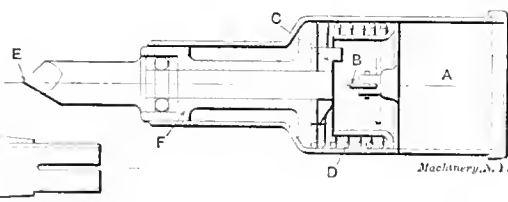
Section through Indicator, showing Clutch and Ball Bearing
